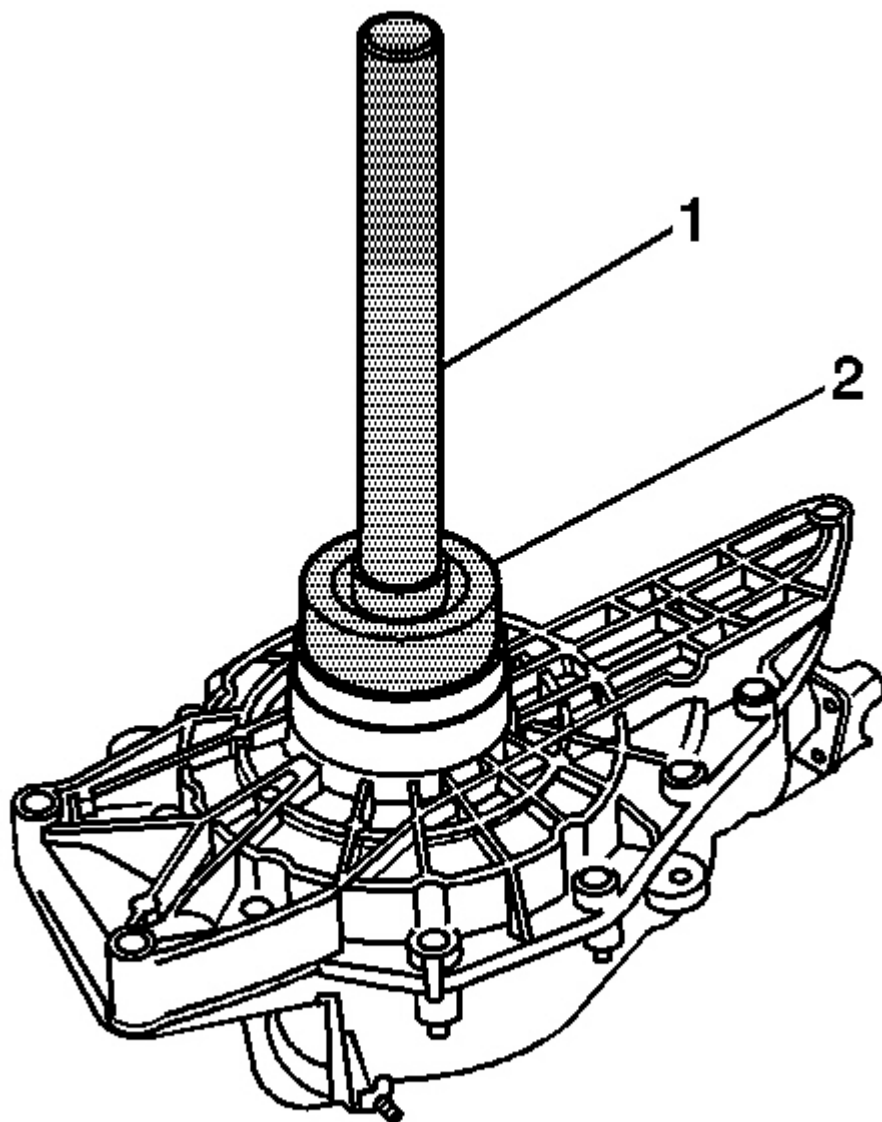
Identifying Axle Seal Installer & Universal Driver Handle (Right)
